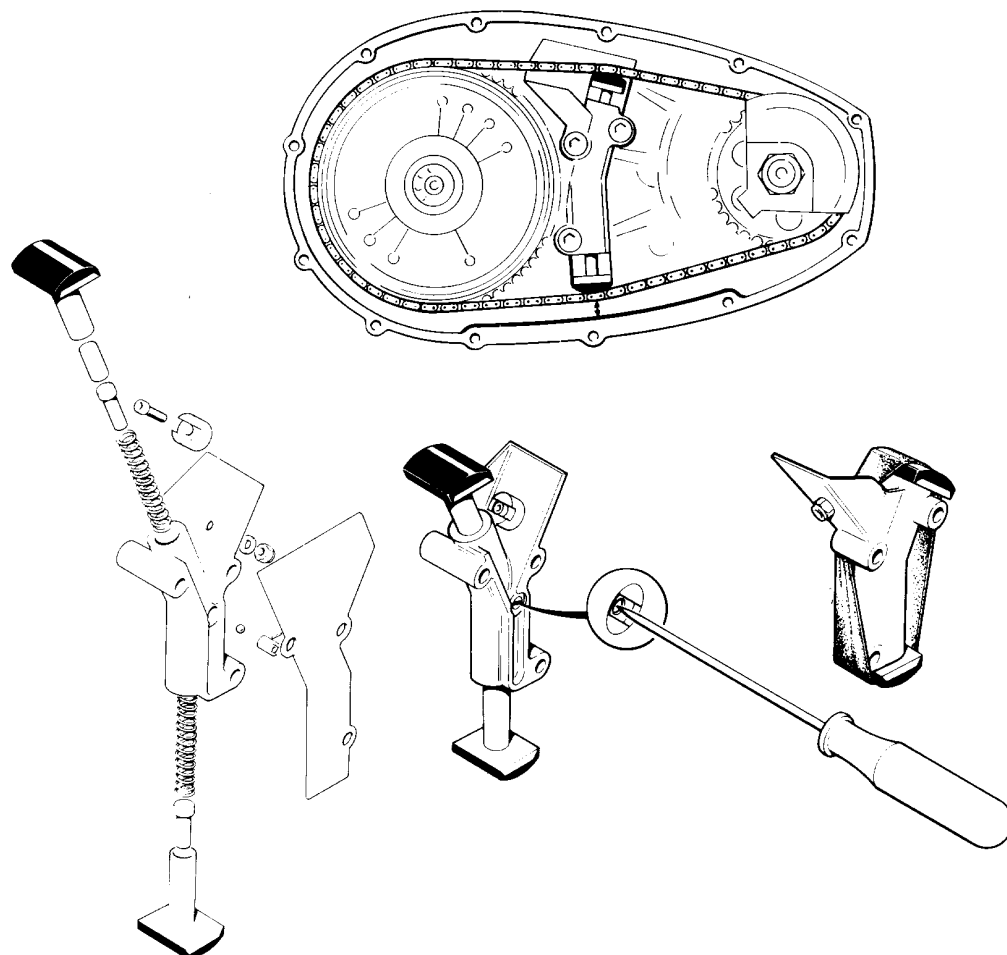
Removing and Replacing the Primary Chain Tensioner
